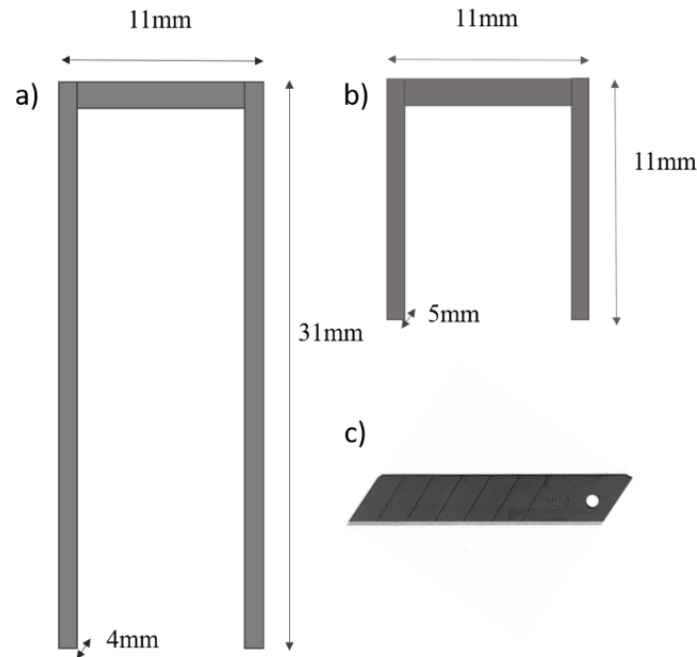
Blade fixtures representing (a) a softer holder, (b) a stiffer holder, and (c) the blade used for cutting tests.
